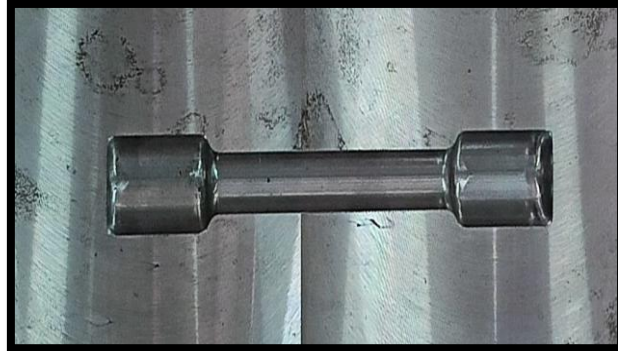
Tensile Specimen Mould According to ASTM E-8 Standards.
